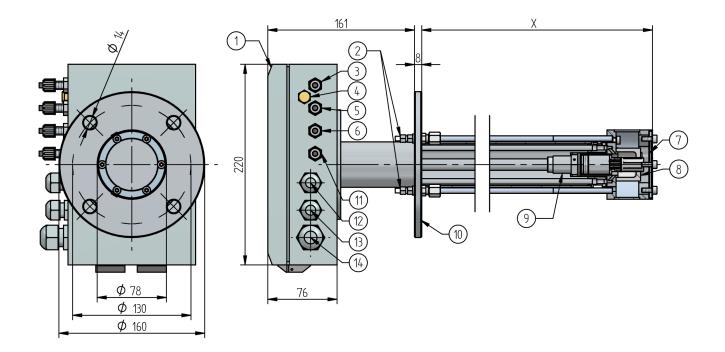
KAF Probe with purge unit (dimensions in mm)
